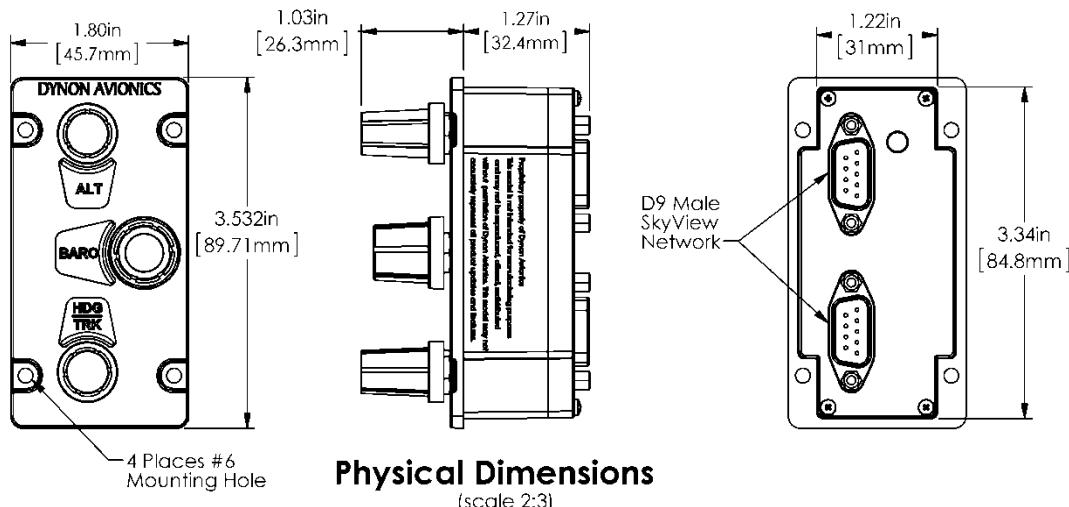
SV-KNOB-PANEL, Mounting Dimensions
